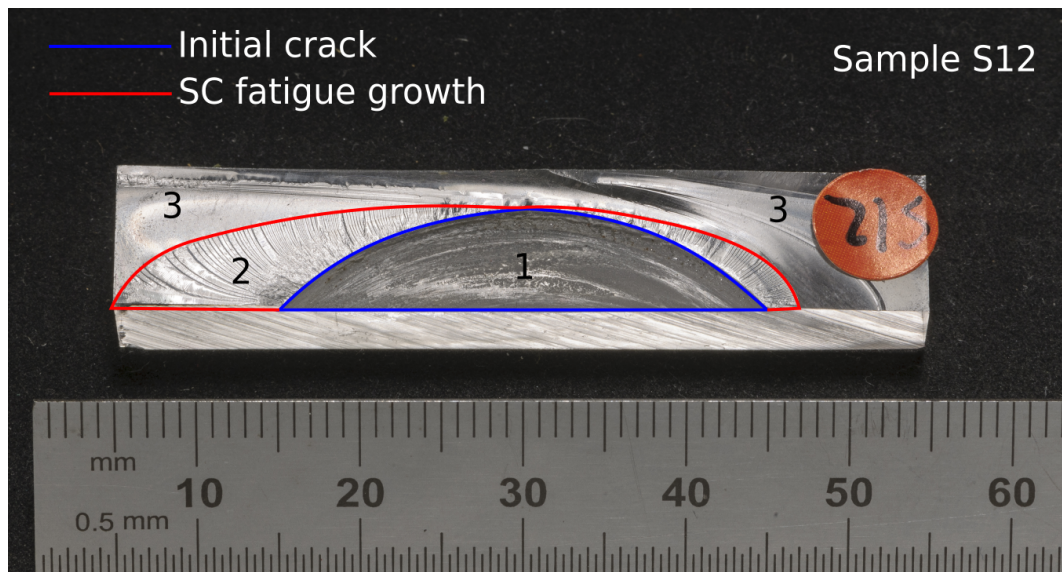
Test on Perspex plate - Fracture surface - Sample S12
